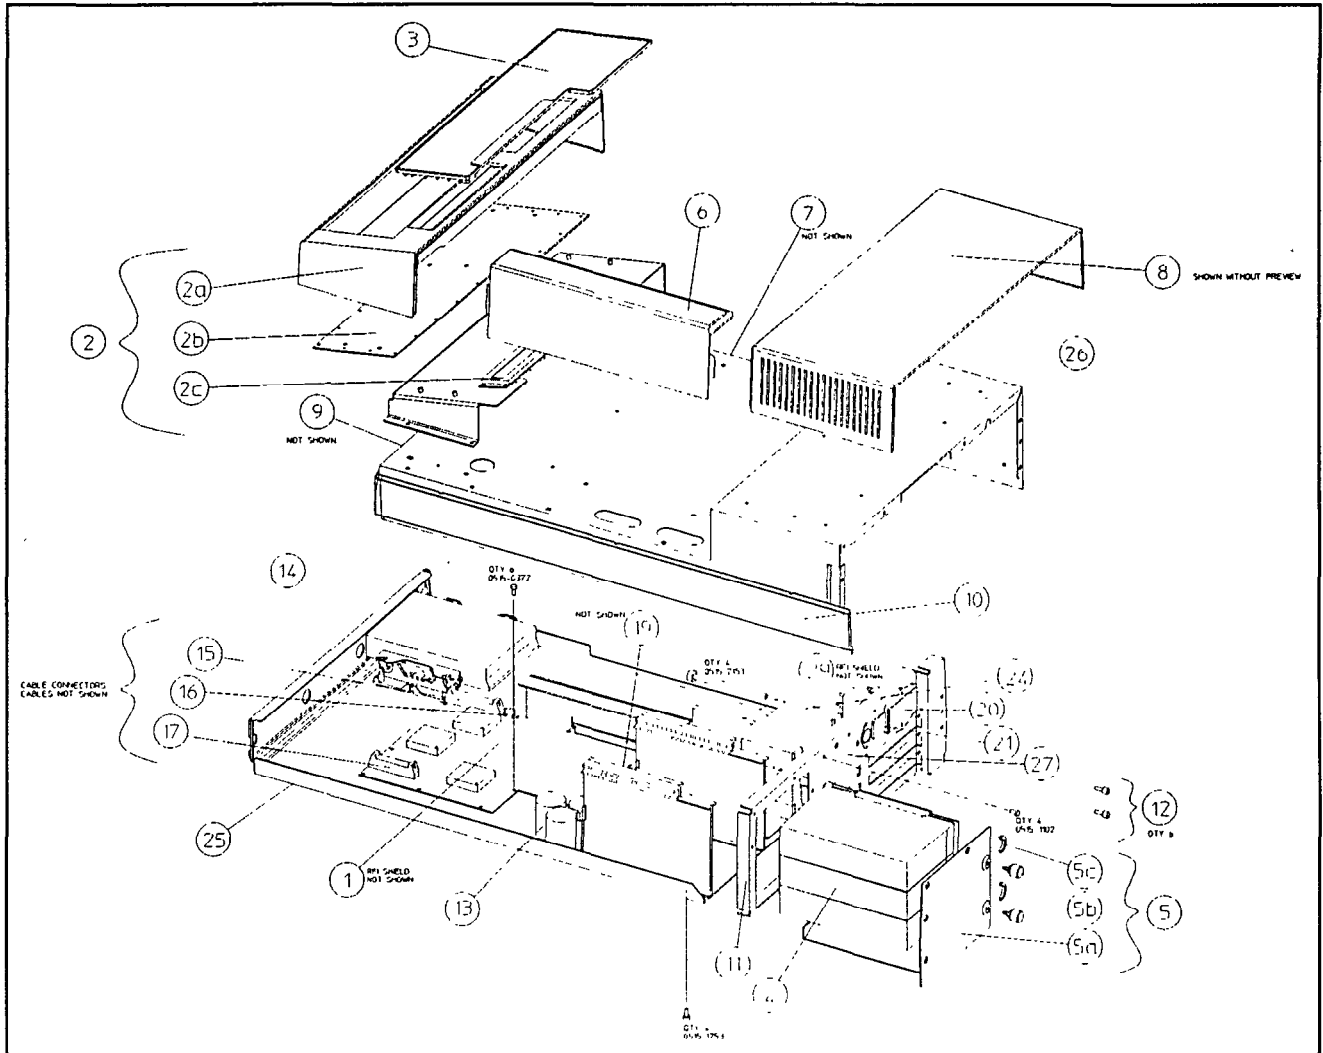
Main Assembly Exploded Diagram (Serial Number Prefix Prior to 3208A).
